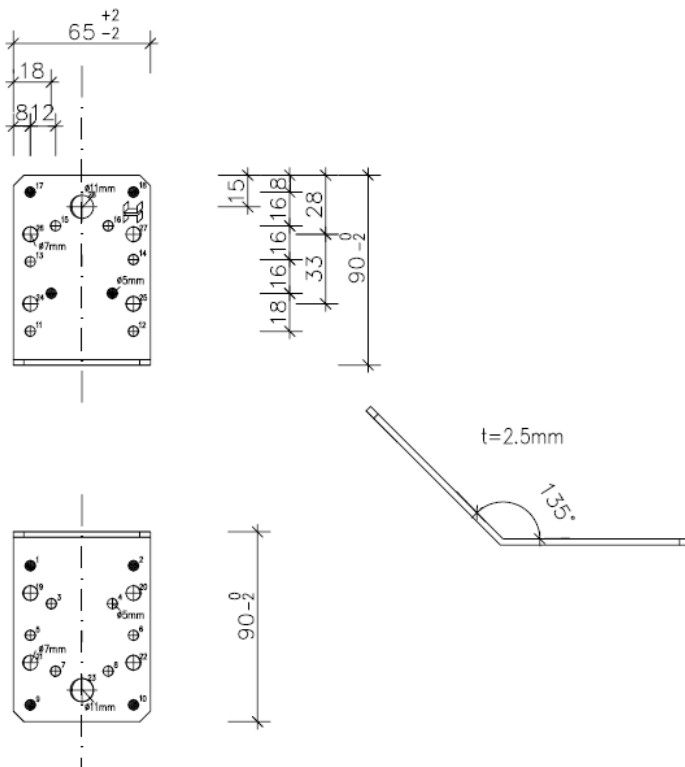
Dimensions of Angle Bracket SXFLH13590
